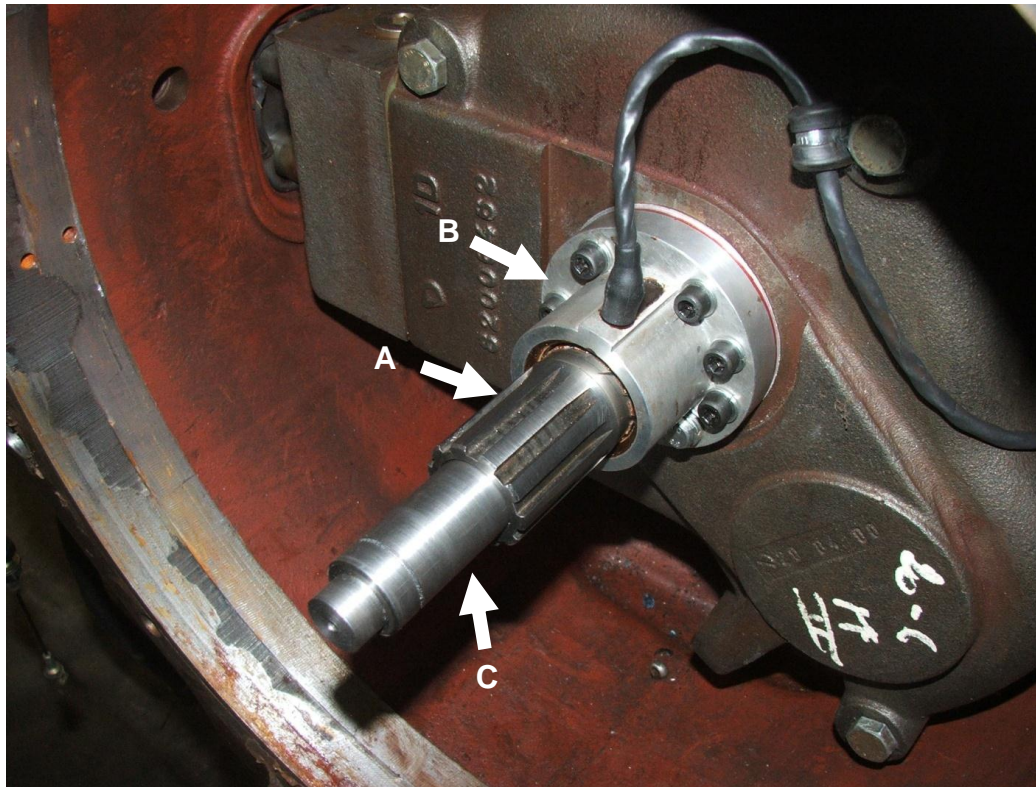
View from the front of the tractor looking into the bellhousing showing the gearbox input shaft (A) the Torductor housing (B) and the plunger mechanism used to maintain the axial position of the shaft (C).
